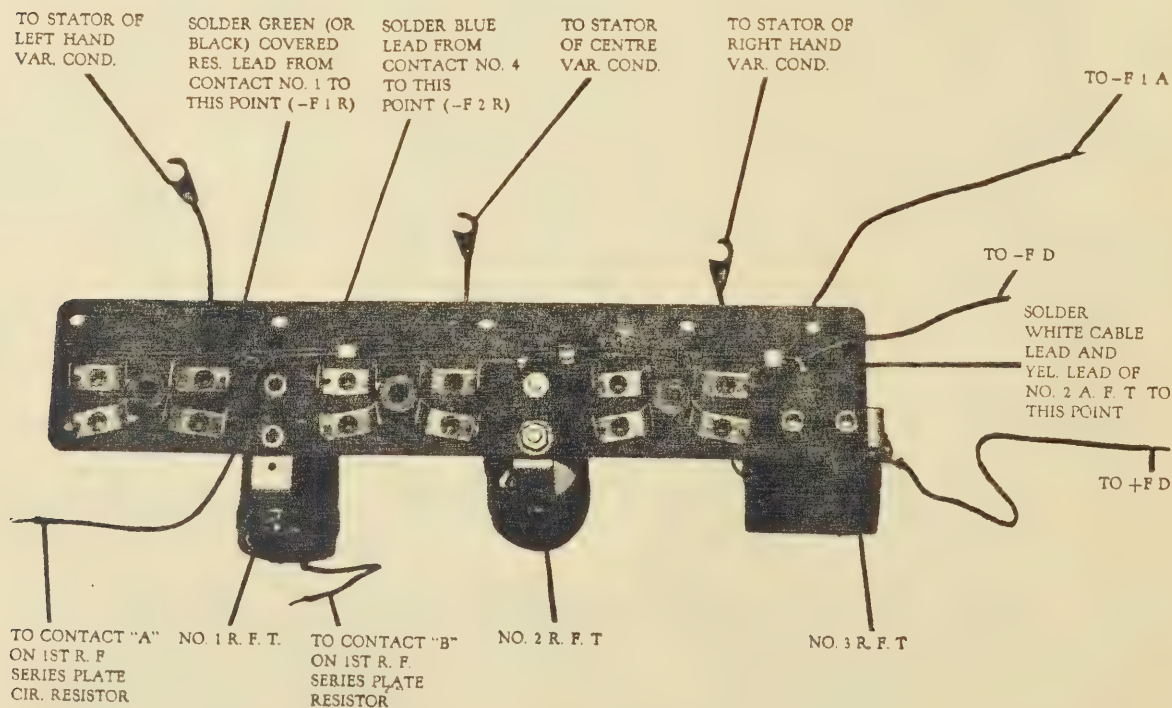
VIEW OF R. F. AMPLIFIER ASSEMBLY, SHOWING WHERE EACH LEAD IS TO BE CONNECTED.
